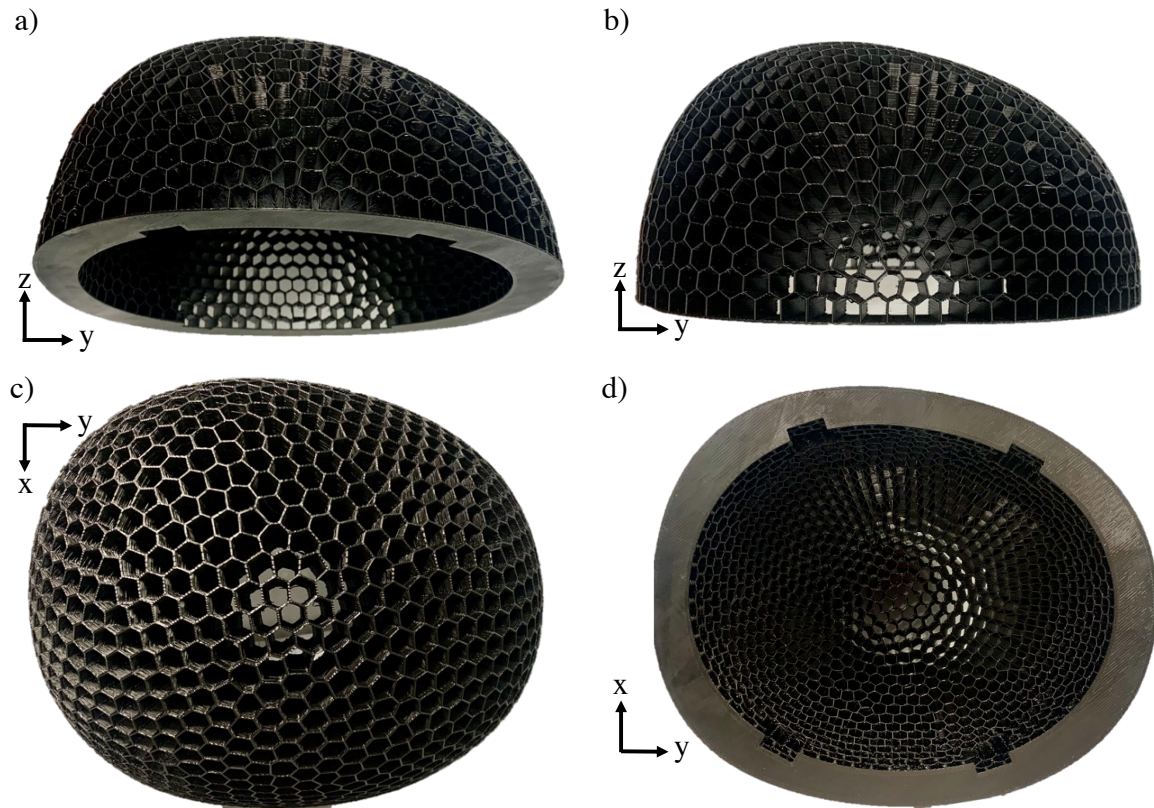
3D-Printed Full-Scale Honeycomb Helmet
